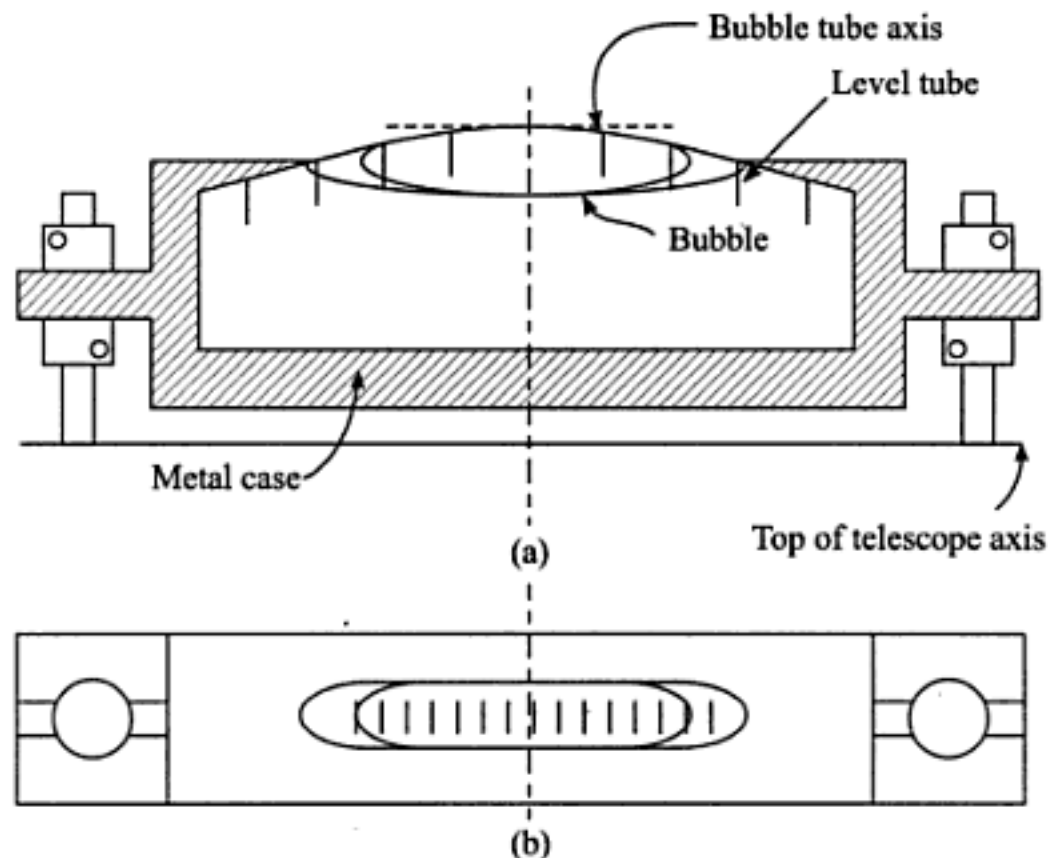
A bubble tube: (a) Cross section. (b) Plan.
